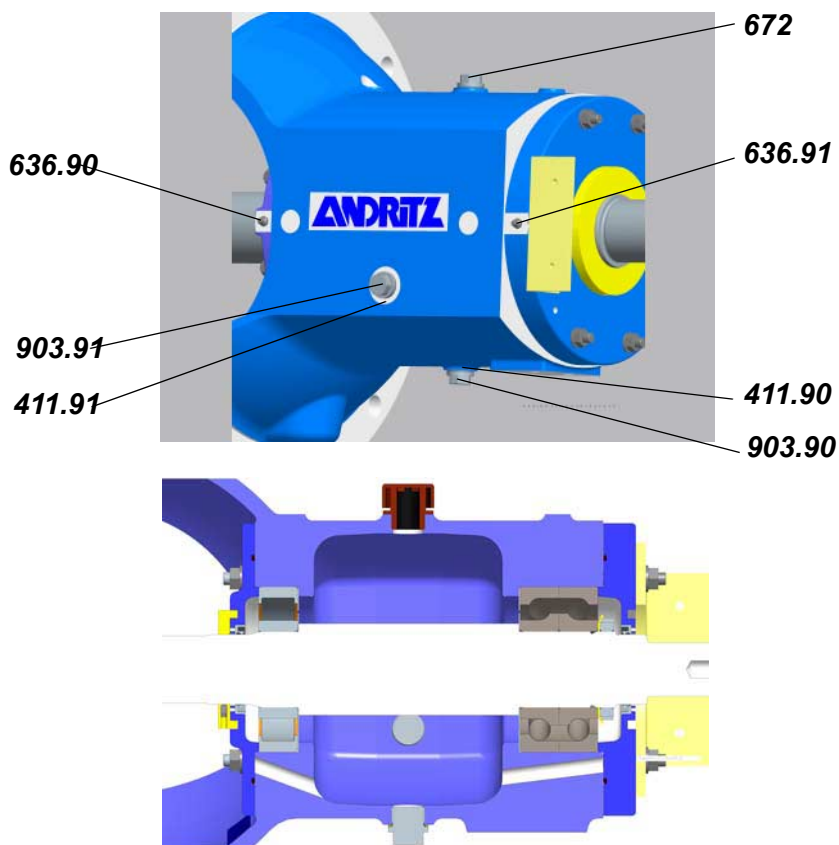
Grease lubrication at the bearing, bearing support section
